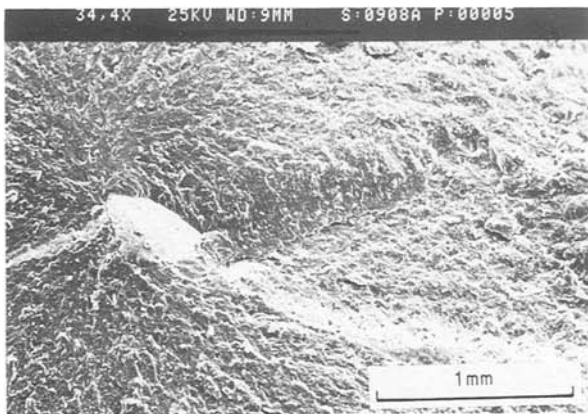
Fractured tensile specimen of silica filled epoxy resin showing rupture initiated at a foreign body incorporated inadvertently into the casting during specimen preparation.
